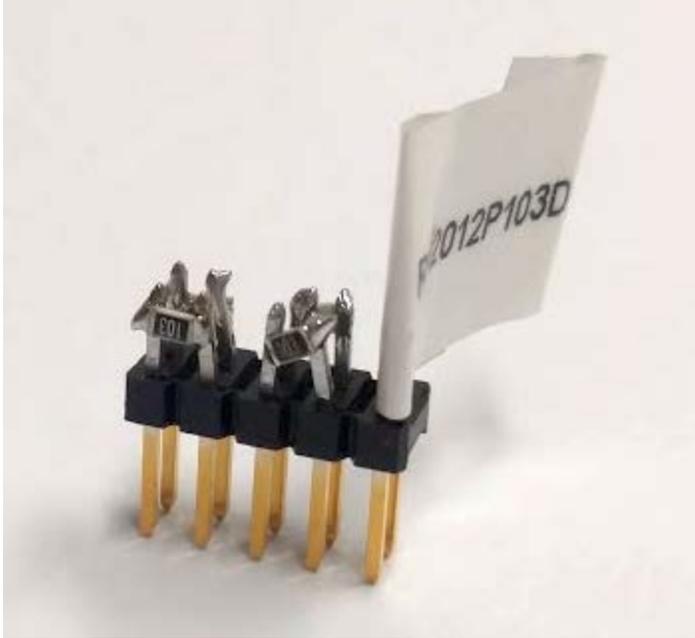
Unshrouded header for resistors. A little fragile but is easier to mate correctly than the shrouded one
